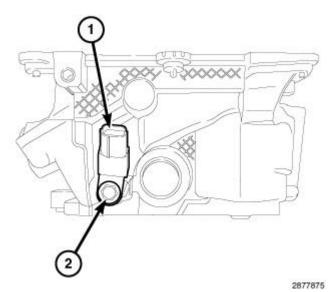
Ignition Coil Capacitor & Bolt Courtesy of CHRYSLER GROUP, LLC
